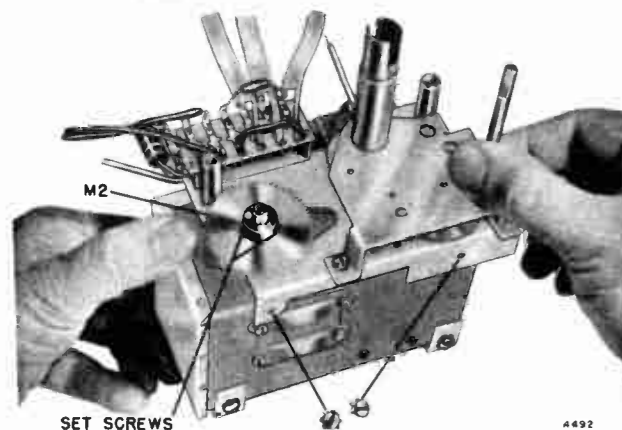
Front View of UHF Tuner A4160 Showing Removal of Gear Train.
